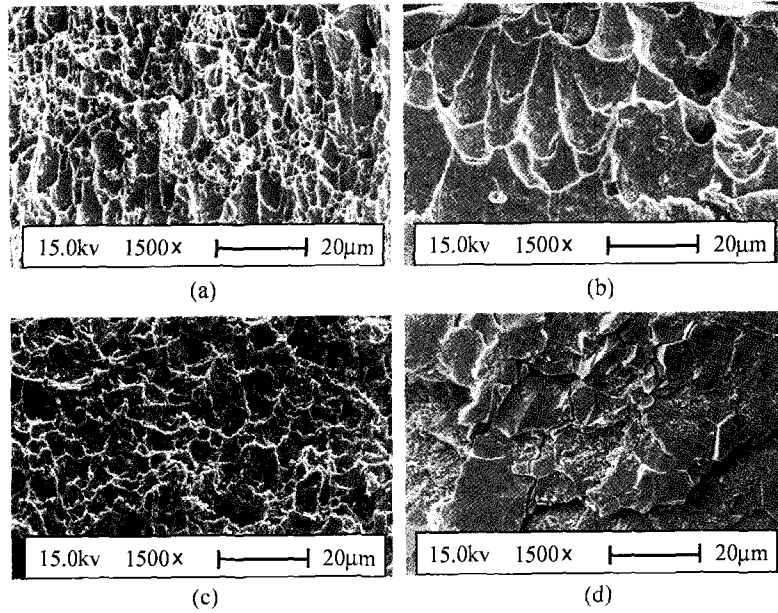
Fracture surface of Sn/3.5Ag/0.75Cu (a: No aging, b: Aging 170°C, 900 h) and Sn/2.0Ag/0.5Cu/2.0Bi (c: No aging, d: Aging 170°C, 900 h)
